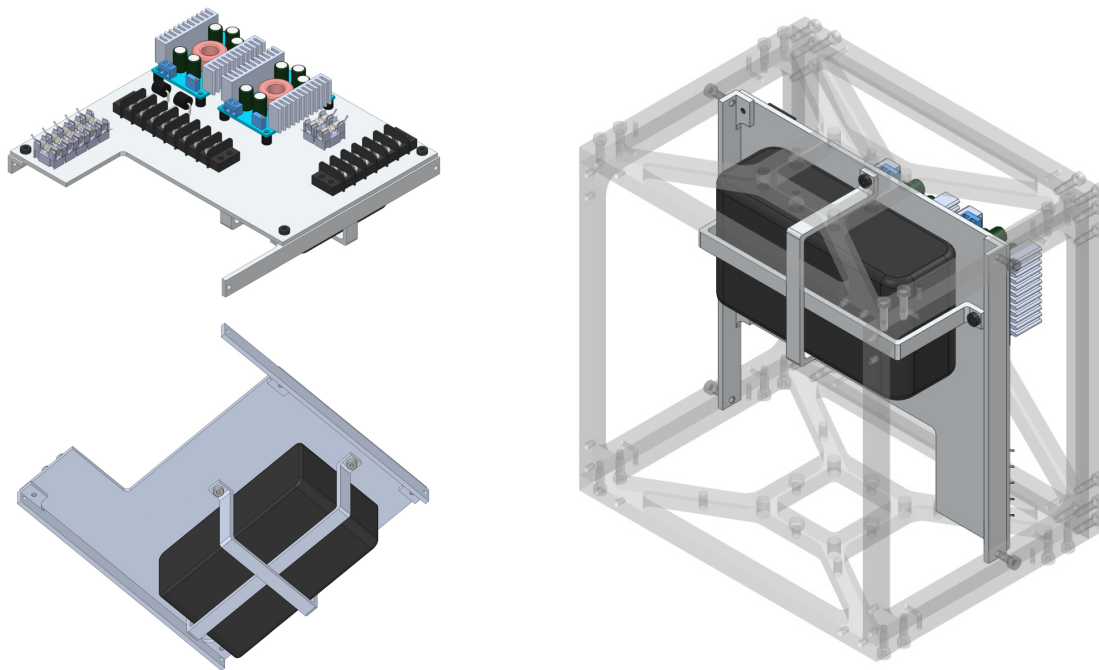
Isometric view of the power electronics subassembly (top left); alternate isometric view of the power electronics subassembly (bottom left); the power electronics subassembly mounted inside the chassis with the chassis displayed transparent (right).
